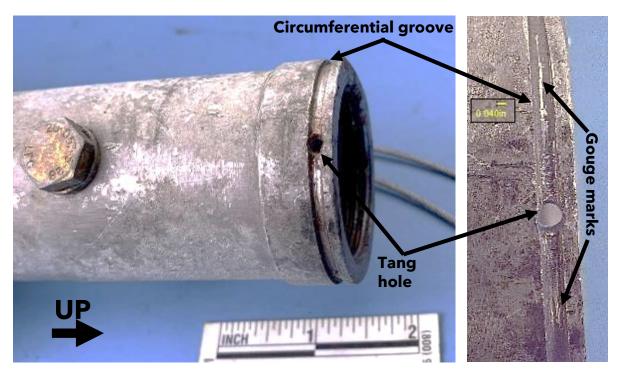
Oblique view of the top end of the barrel showing the circumferential groove for the lock ring and hole for lock ring (left image); and close-up view of gouge marks in the groove (right image).
